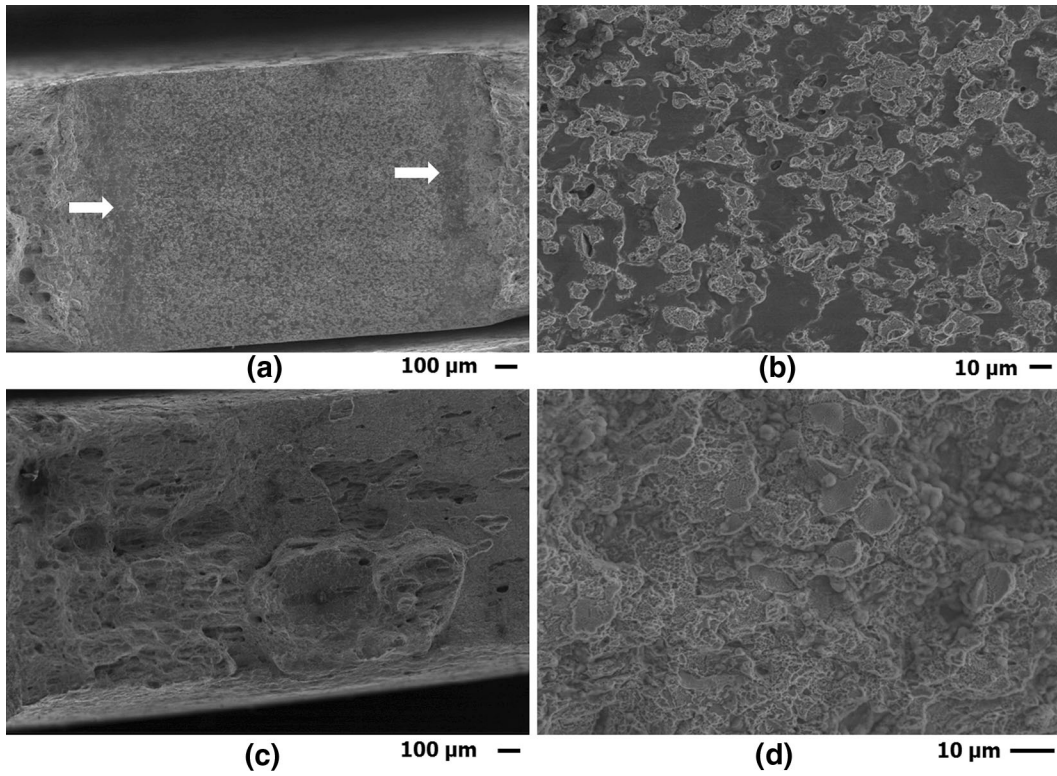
(a) 10 pct rolled RD pore sample surface after a tensile test, (b) locally welded 10 pct rolled RD pore sample surface, (c) 30 pct rolled RD pore sample surface after a tensile test, and (d) 30 pct rolled perfectly welded RD pore sample surface.
